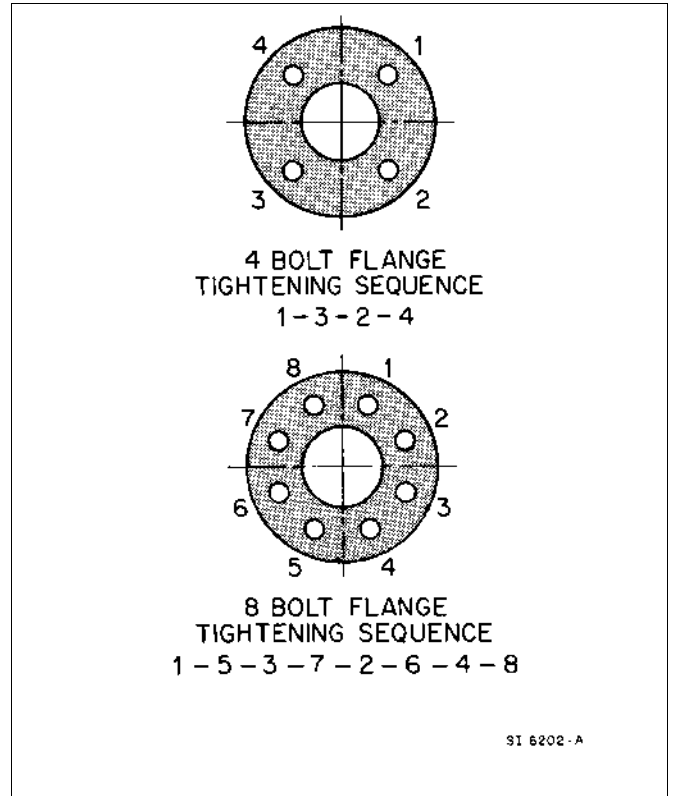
RECOMMENDED FLANGE BOLT TIGHTENING SEQUENCE
